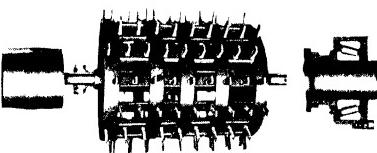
Thresher cylinder. Enlarged view of anti-friction bearing box.
